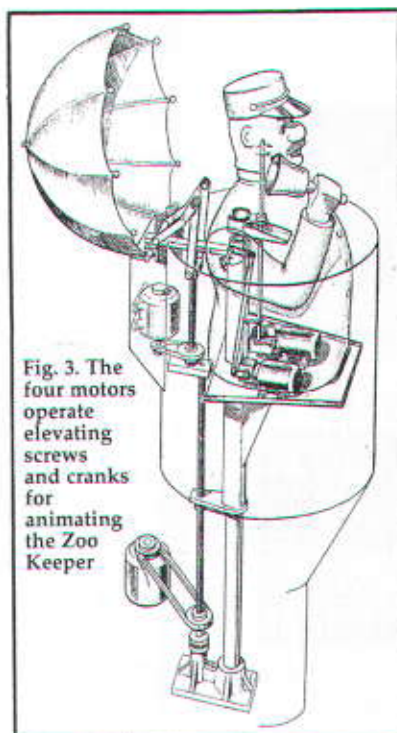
The four motors operate elevating screws and cranks for animating the Zoo Keeper
